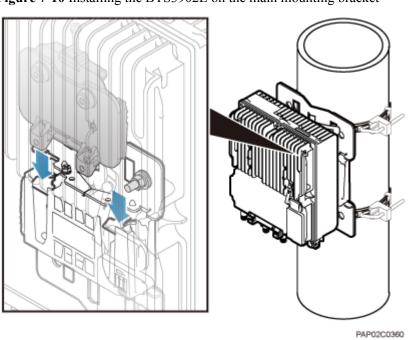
Installing the BTS3902E on the main mounting bracket
